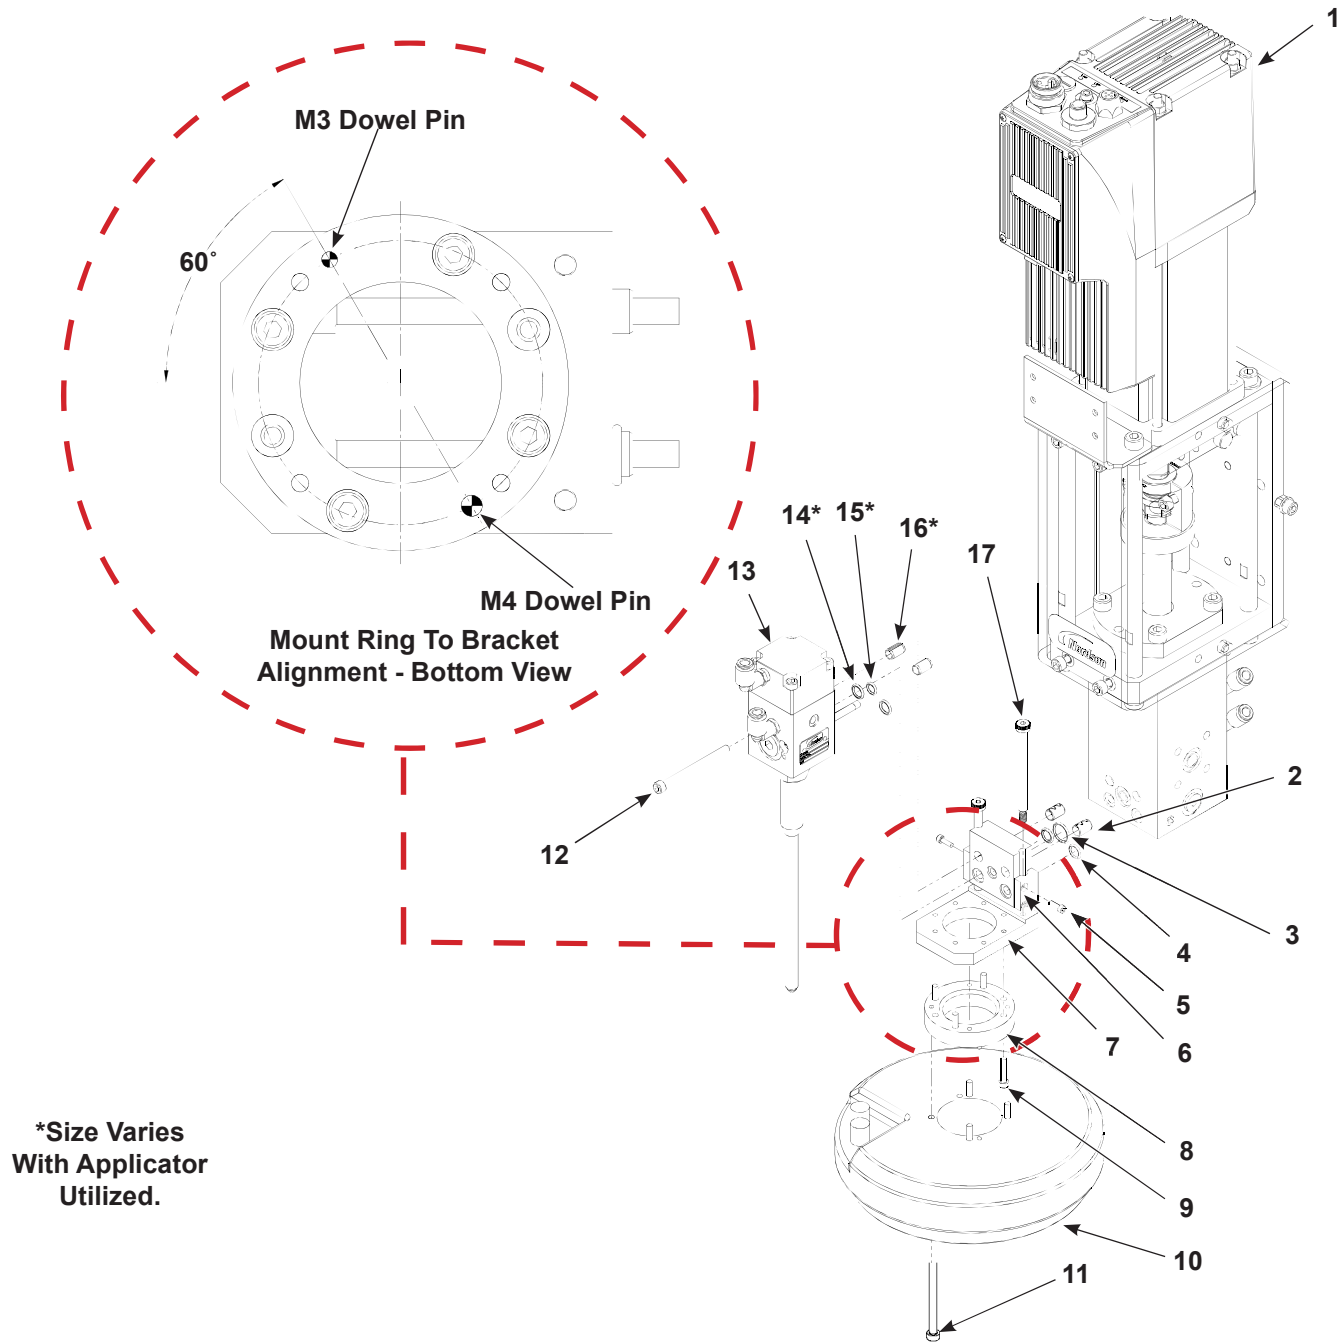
Manifold Mounting Kit (Temperature Conditioning)
